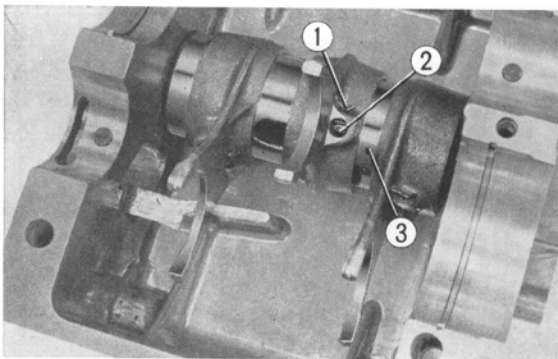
① Guide pin clip ② Guide pin ③ Gear shift drum
